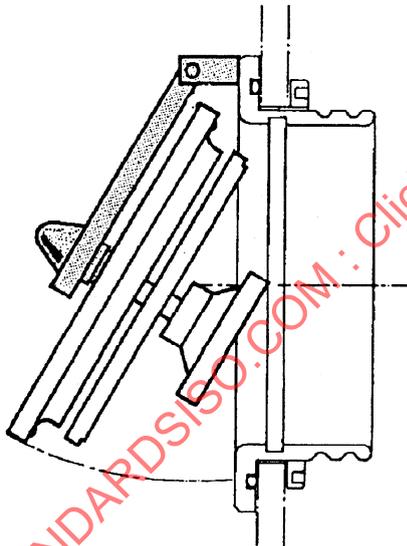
Bungs with cruciform clamp plate and inner centring cross
